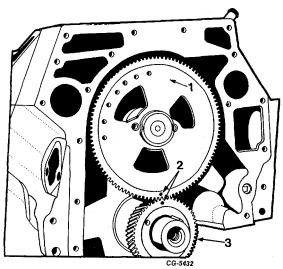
Aligning Timing Marks on Camshaft and Crankshaft Gears.
